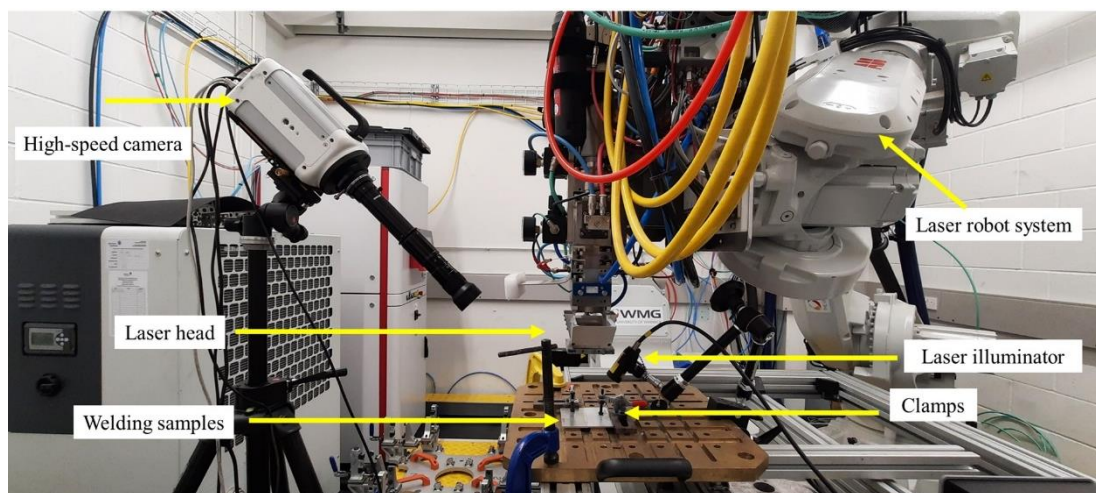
Weld experiment setup for welding AA-6005 with AA-5754 in butt welding configuration using remote laser welding. The setup shows the position of clamps, welding samples, high-speed camera, laser illuminator and laser head.
